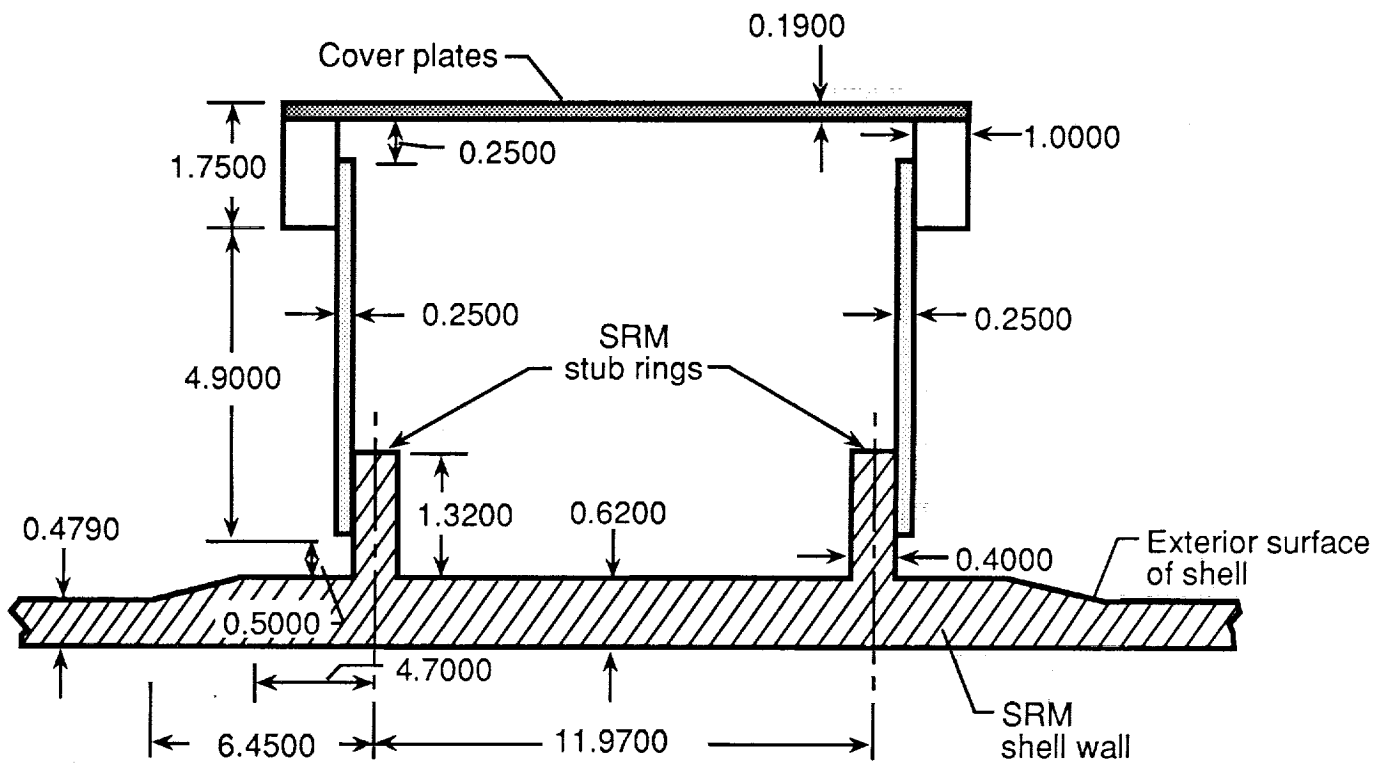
Geometry and dimensions of external tank attachment ring assembly at its largest cross section (not to scale). All dimensions in inches.
